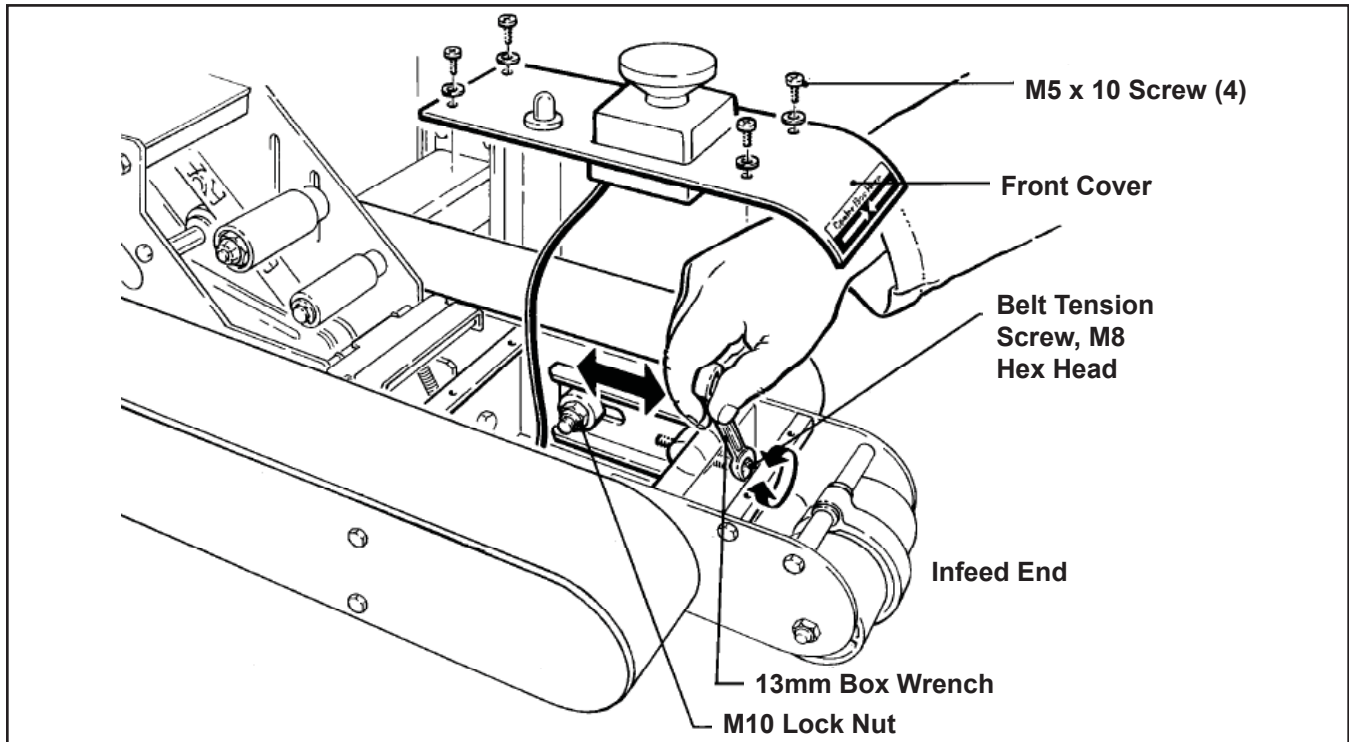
Box Drive Belt Tension Adjustment, Upper Belts (Infeed End)
